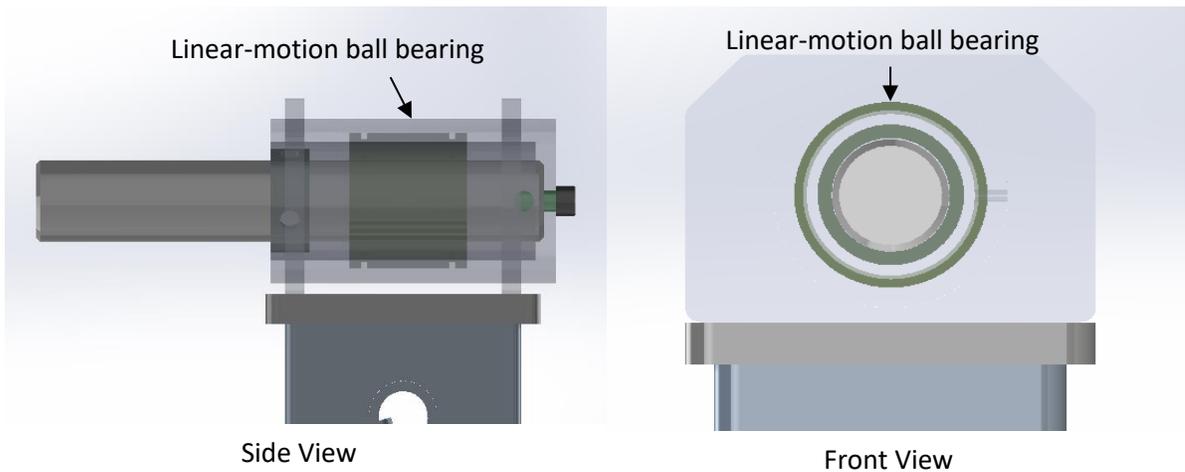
Retractable Shaft Design with Linear-motion Ball Bearing
